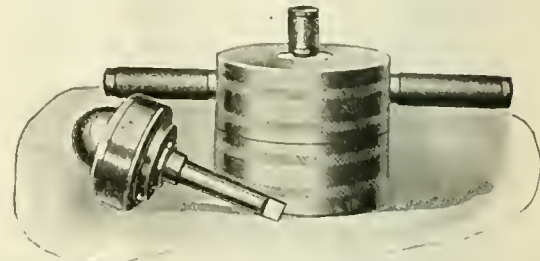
MOLD SET UP FOR CASTING GRINDING SPHERES FOR SEATS IN HEADERS.
